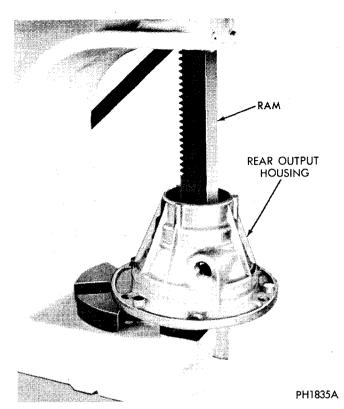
Pressing Rear Output Shaft Rear Bearing out of Retainer
